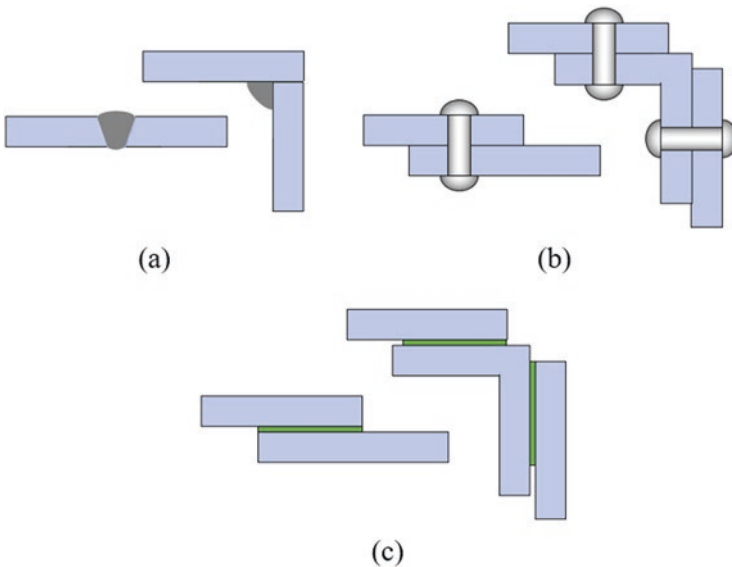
Joining technologies for structural components: (a) welding, (b) mechanical fastening, and (c) adhesive bonding [25]
